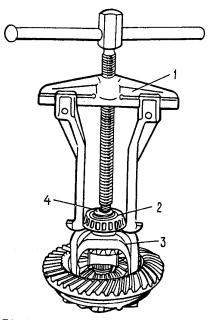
Removing Inner Cone of Differential Case Bearing with General-Purpose Remover Tool A.40005/1/6:
